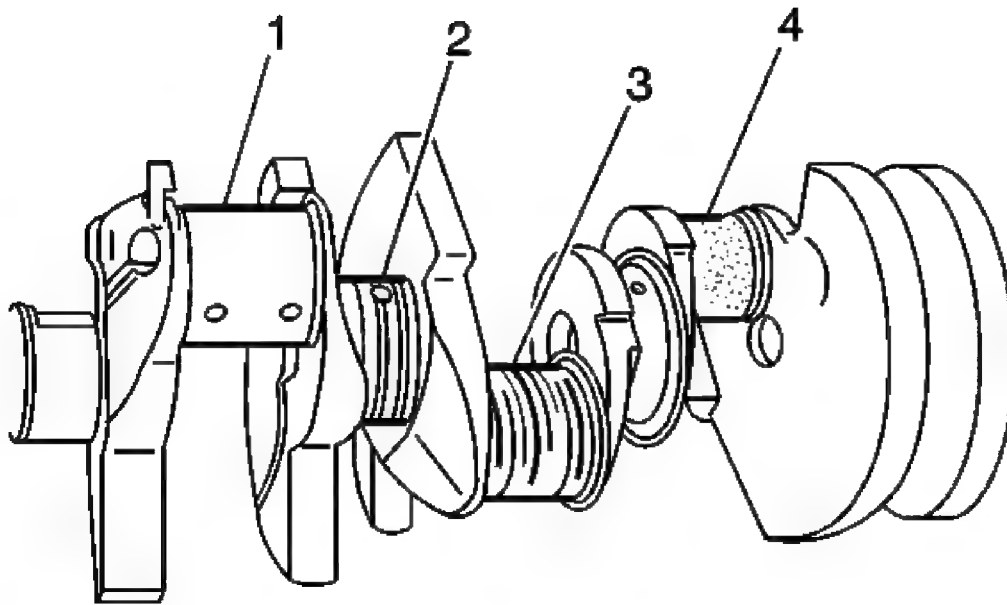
Identifying Different Crankshaft Journal Wear Patterns
